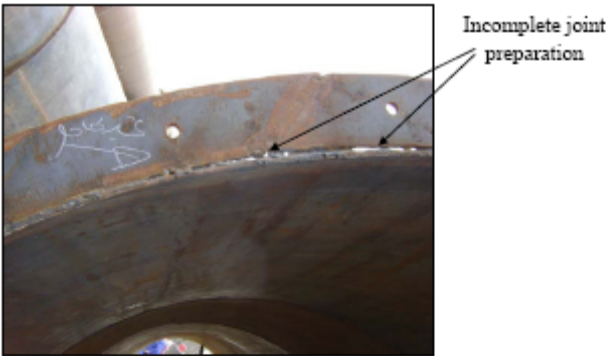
Welding defect - Incomplete joint preparation.
